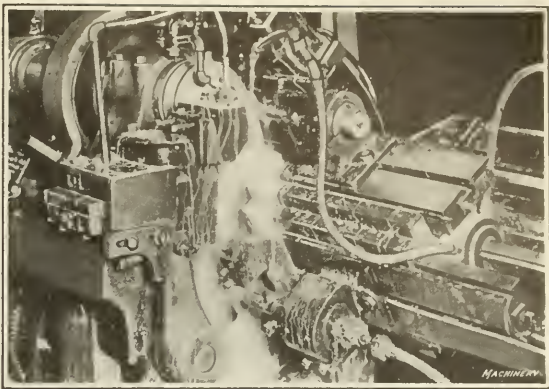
Application of Lubricant to Tools on Automatic Screw Machine
